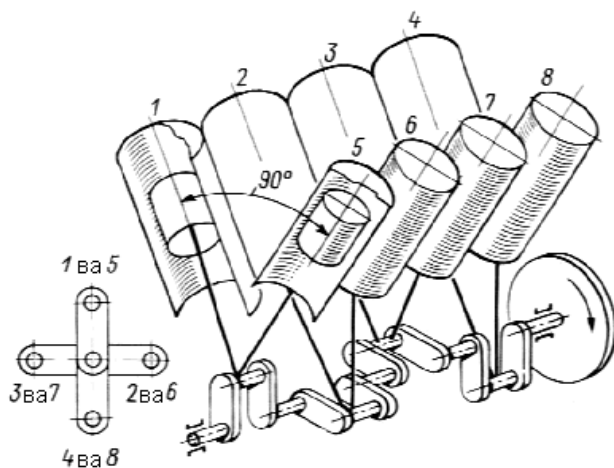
A diagram of a four-stroke eight-cylinder V-shaped engine with a crankshaft mechanism.
